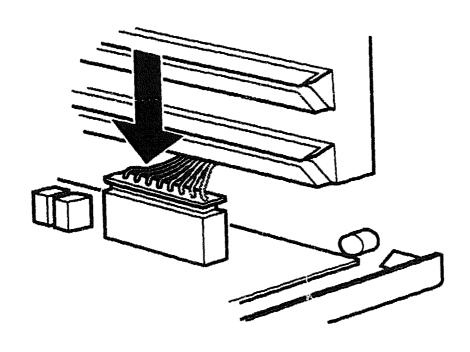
Joining the Ribbon Cable to the Main Board
